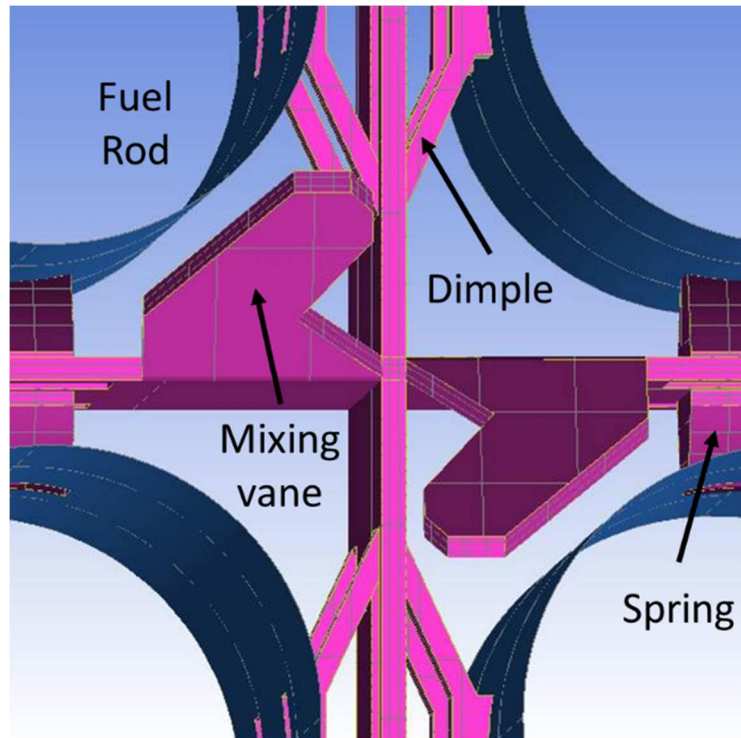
Zoom on fuel rods, guide tubes, springs dimples and mixing vanes (top view)
